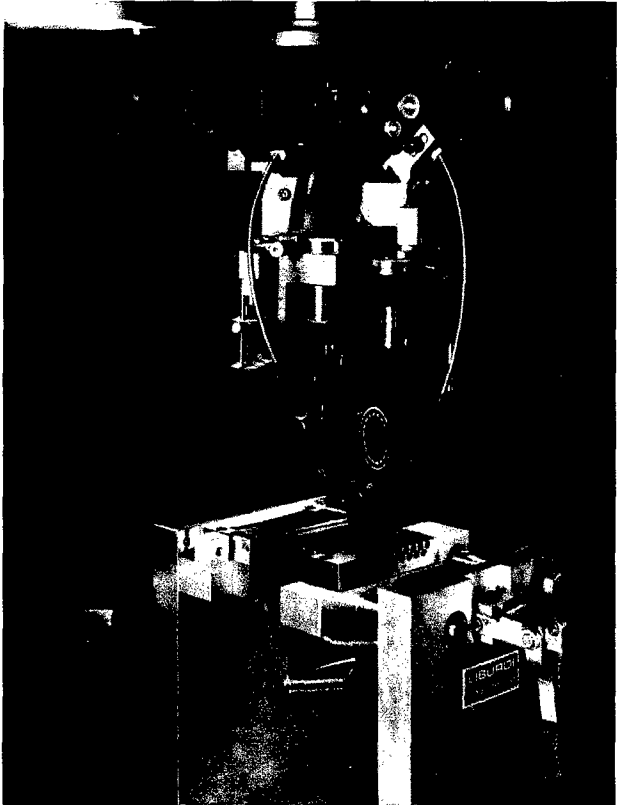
An automated plasma arc welding system is used to restore a rubbed tip on a compressor blade with matching filler material..
